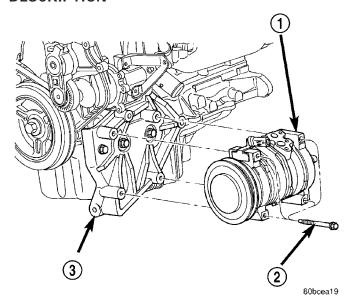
A/C COMPRESSOR MOUNTING BOLTS
